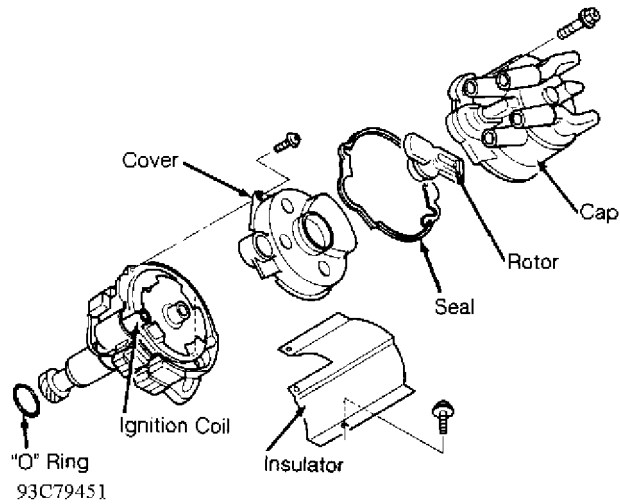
Exploded View Of Distributor (MX-6 2.0L & 626 2.0L)
